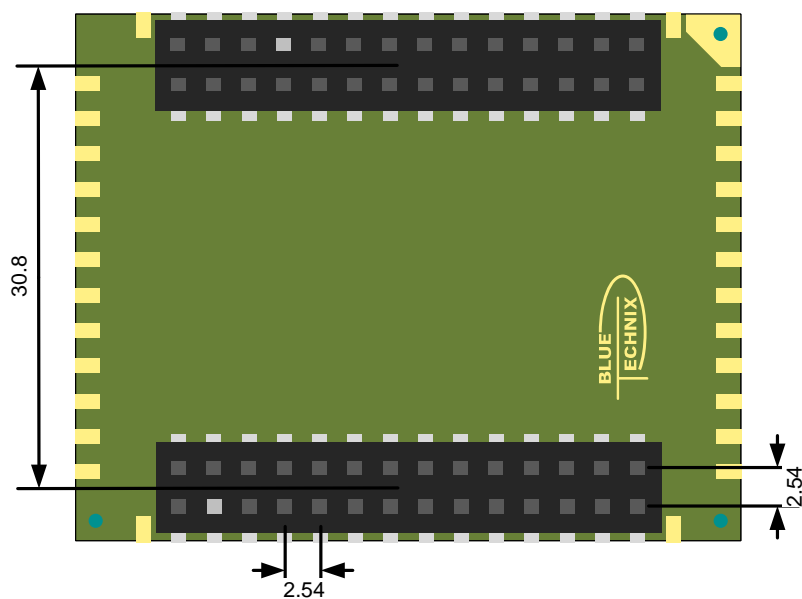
Mechanical dimensions with connectors (bottom view)
